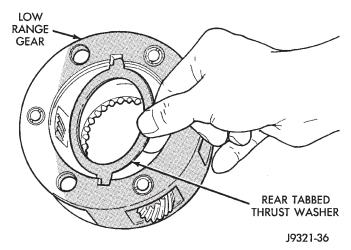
Rear Tabbed Thrust Washer Removal BEARING AND SEAL INSTALLATION
